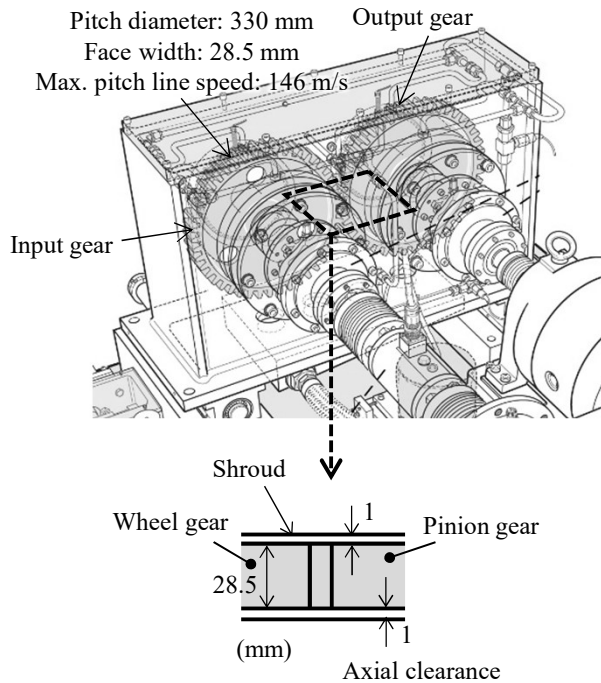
A clearance setting between spur gears and a shroud [63]
